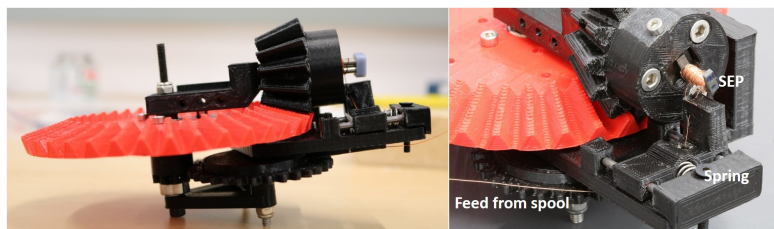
3D printed, manual winding device for rapid production of SEPs. The SEP is mounted into the black piece with a screw; the spring keeps the wire from a spool taut during winding, similar to the mechanism on a sewing machine. A full turn of the red wheel adds roughly 100 turns to the SEP.
